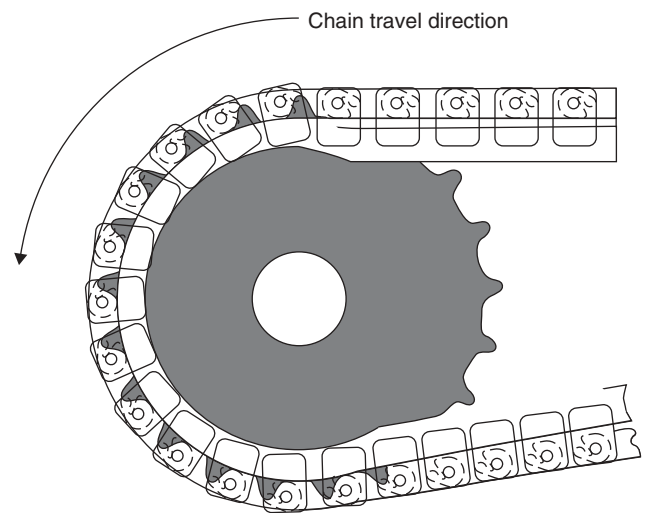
Sprocket drive for overhead conveyor. (From *SpanTech Drive Chain Owner's Manual*.)
